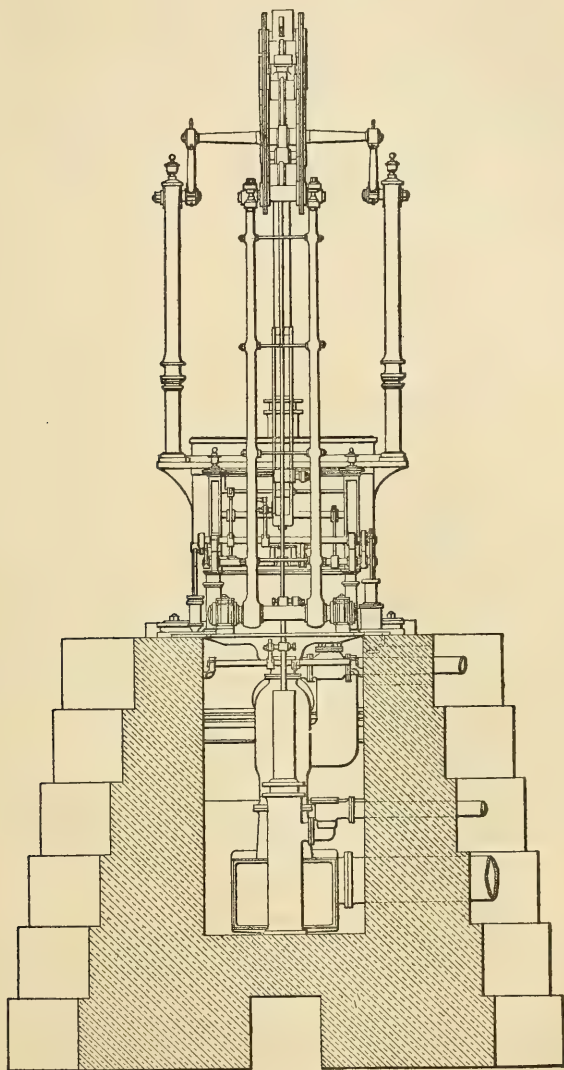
Overhead-beam Pumping Engine. End Elevation.
